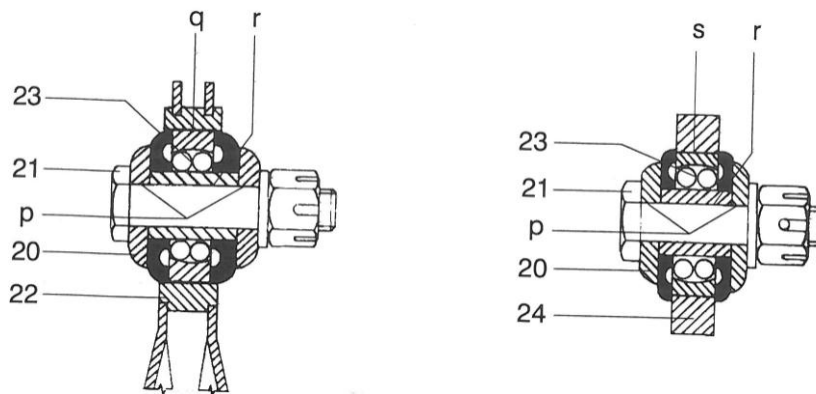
Dimensions, allowances and plays in elevator control fittings
